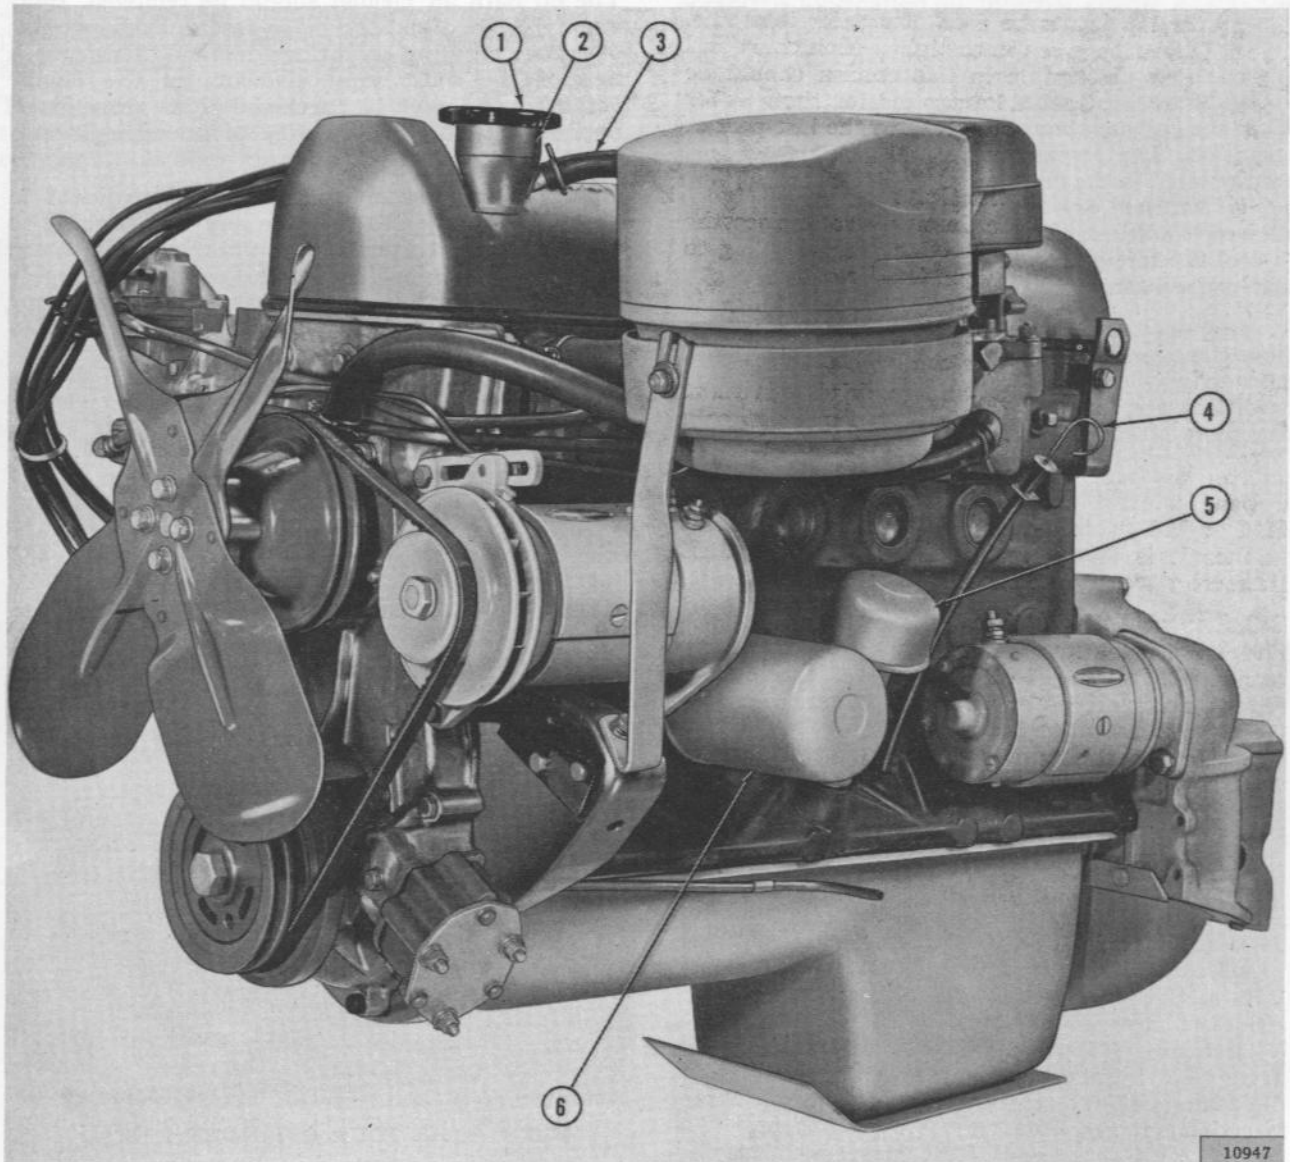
A—THE 6 CYLINDER "TORNADO" OVER HEAD CAM ENGINE—MANIFOLD SIDE
